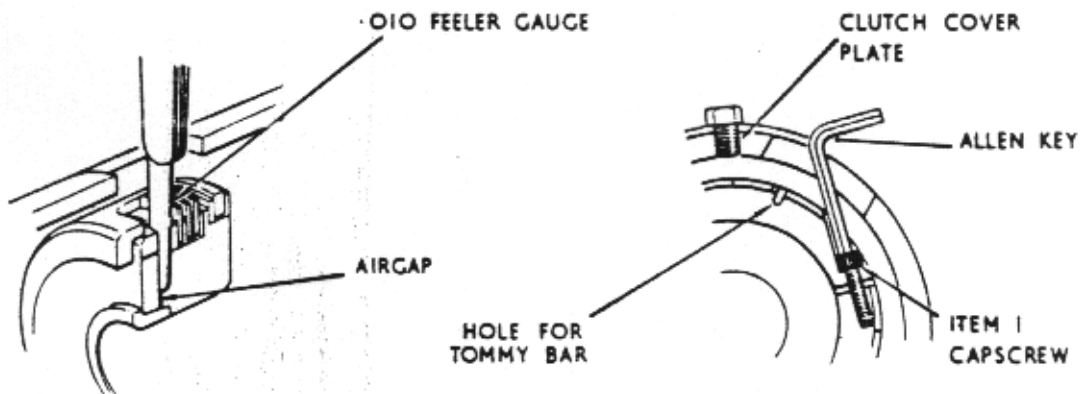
ADJUSTMENT TO DRAGLINE WINCH CLUTCH
